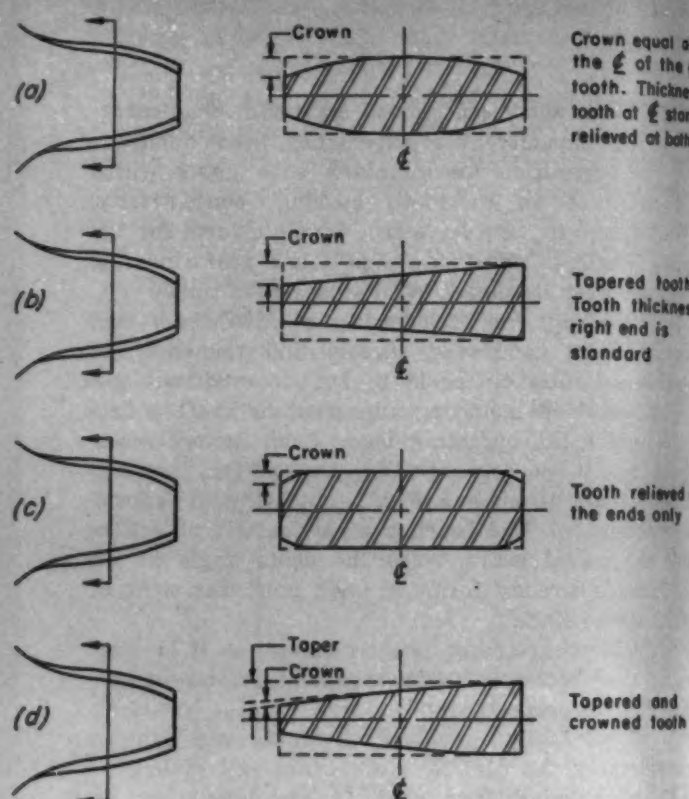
Above—Early methods to relieve gear tooth ends included rocking the gear during grinding in the plane of the grinding wheel as the wheel passed between the tooth flanks, thus making the cut slightly deeper, and the teeth thinner at the ends. The tooth form produced in this way was the elliptical crown
